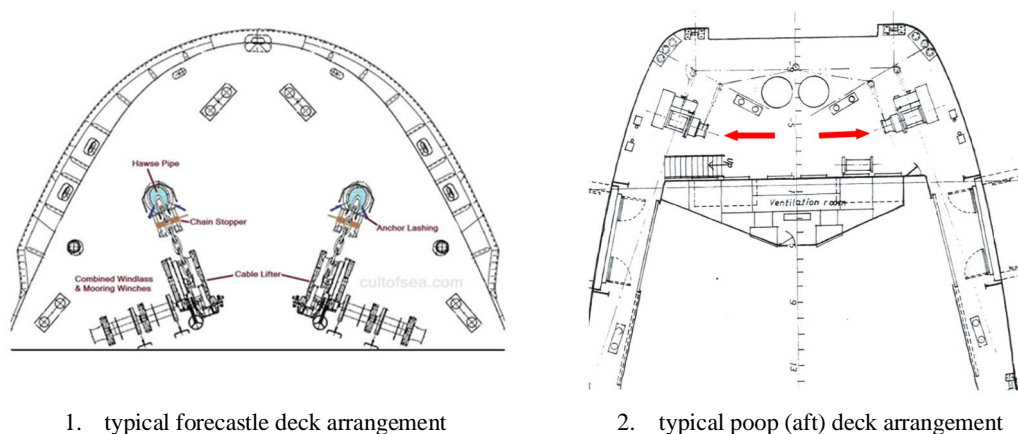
Typical mooring arrangements (Image credit : <https://cultofsea.com/>)
